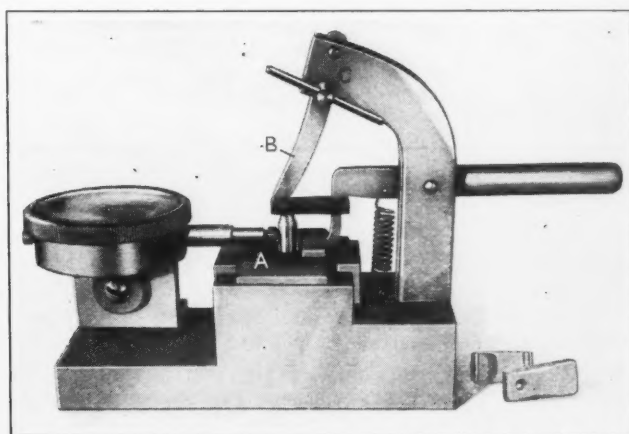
Use of Gage for inspecting Sprinkler-head Bars
